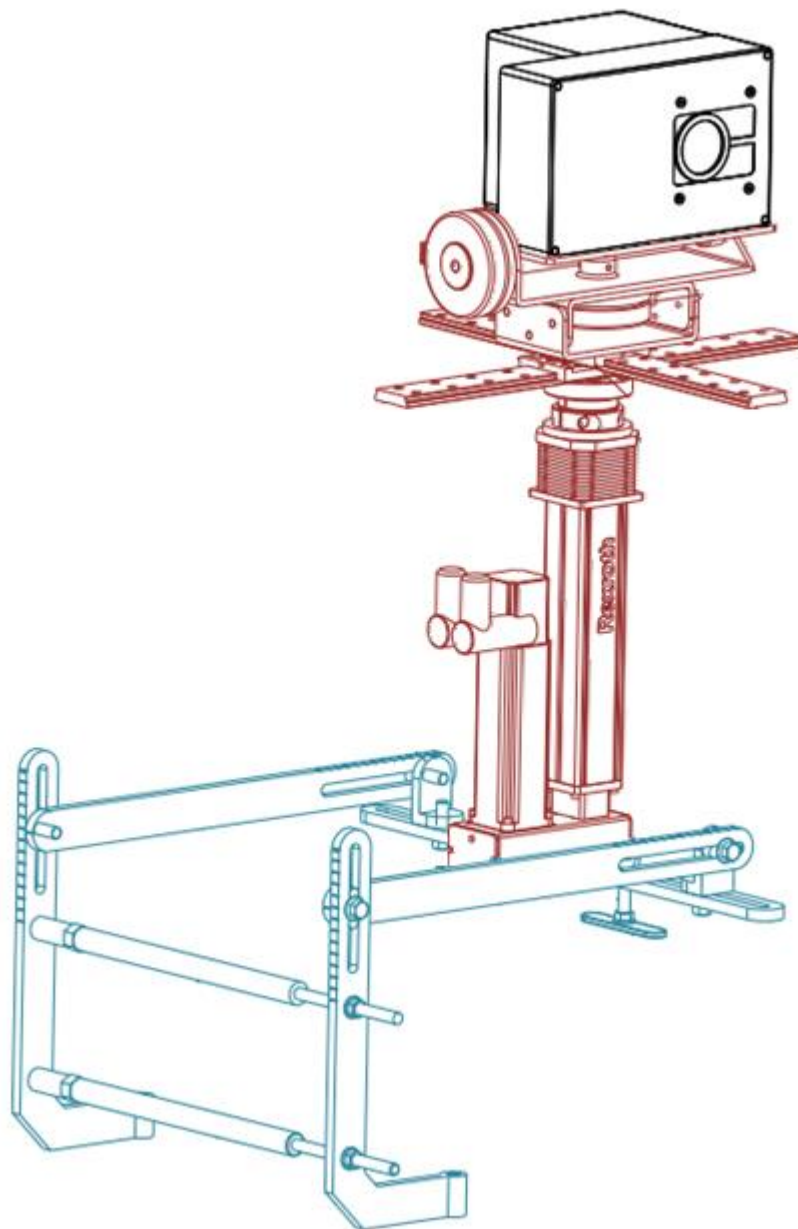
Final camera mounting system concept; Tower assembly (red) and Cradle assembly (blue)
